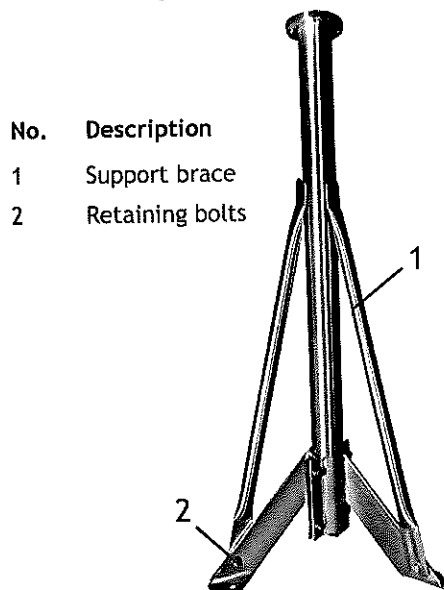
Attaching the Support Braces to the Mounting Base Tripod
